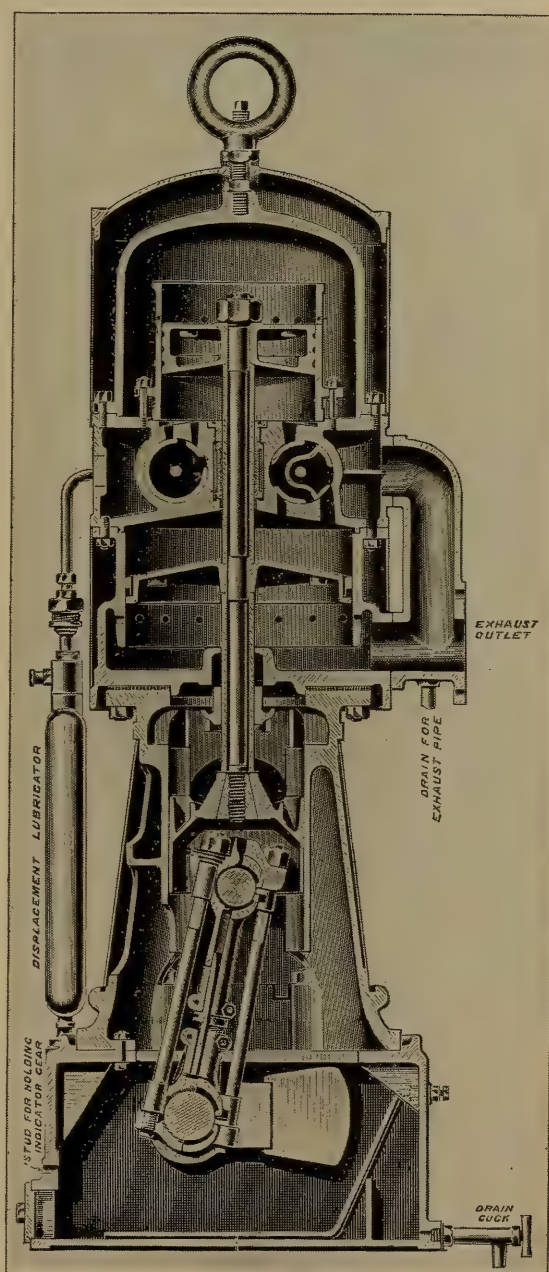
THE "UNIVERSAL" ENGINE. BUILT BY THE BRUSH ELECTRICAL ENGINEERING CO., LTD., LONDON
